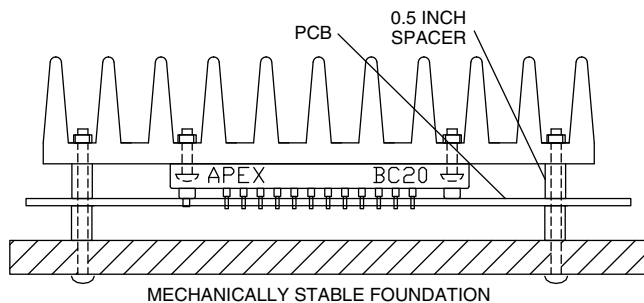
Heatsink is not mechanically supported by the PCB or the BC Amplifier.
